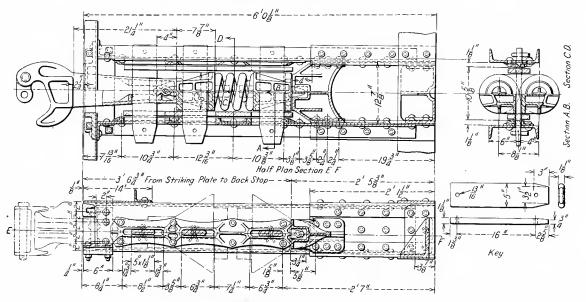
Farlow Spring Draft Gear with M. C. B. Class G, 8 in. by 7% in. Twin Springs. T. H. Symington Company.
